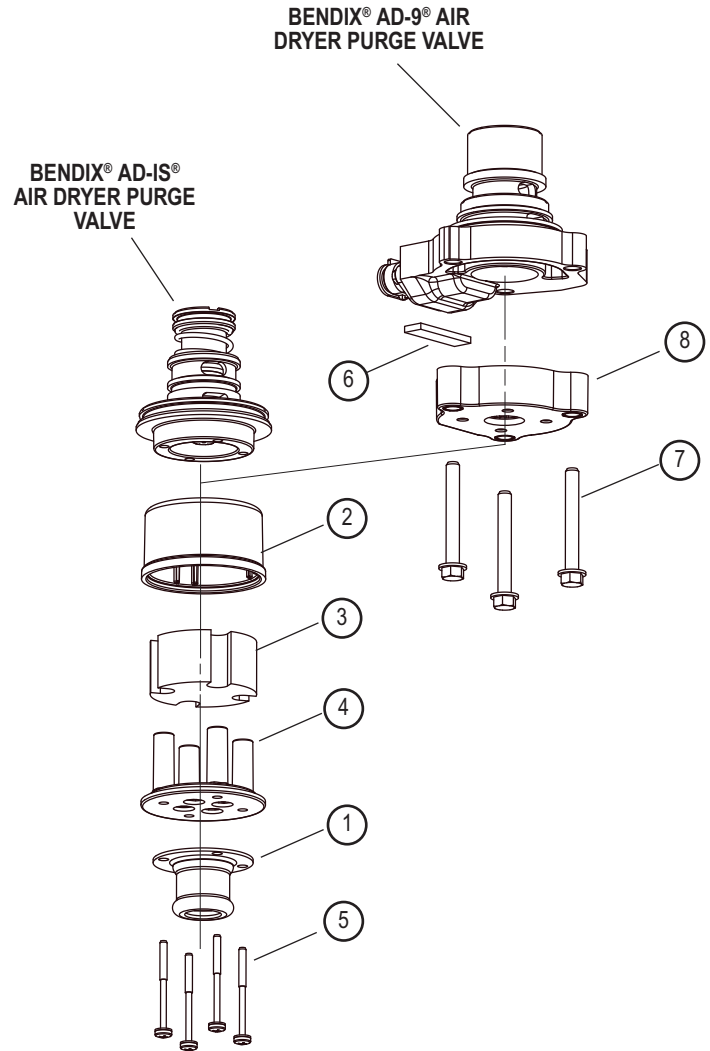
EXPLODED VIEWS AND SILENCER KITS
